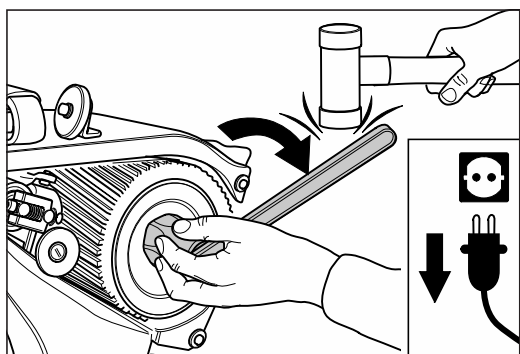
Release the box nut (left-hand thread), if necessary by knocking gently with a soft hammer. Never use a steel hammer!
